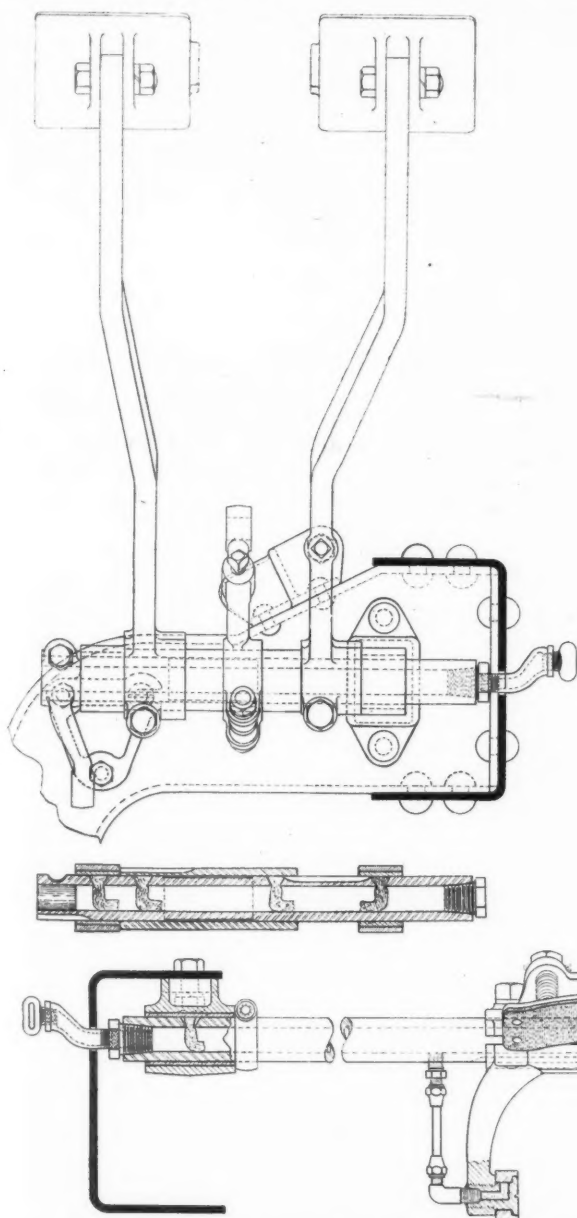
Clutch and brake assembly showing four bearing surfaces lubricated from same reservoir with one point of filling
